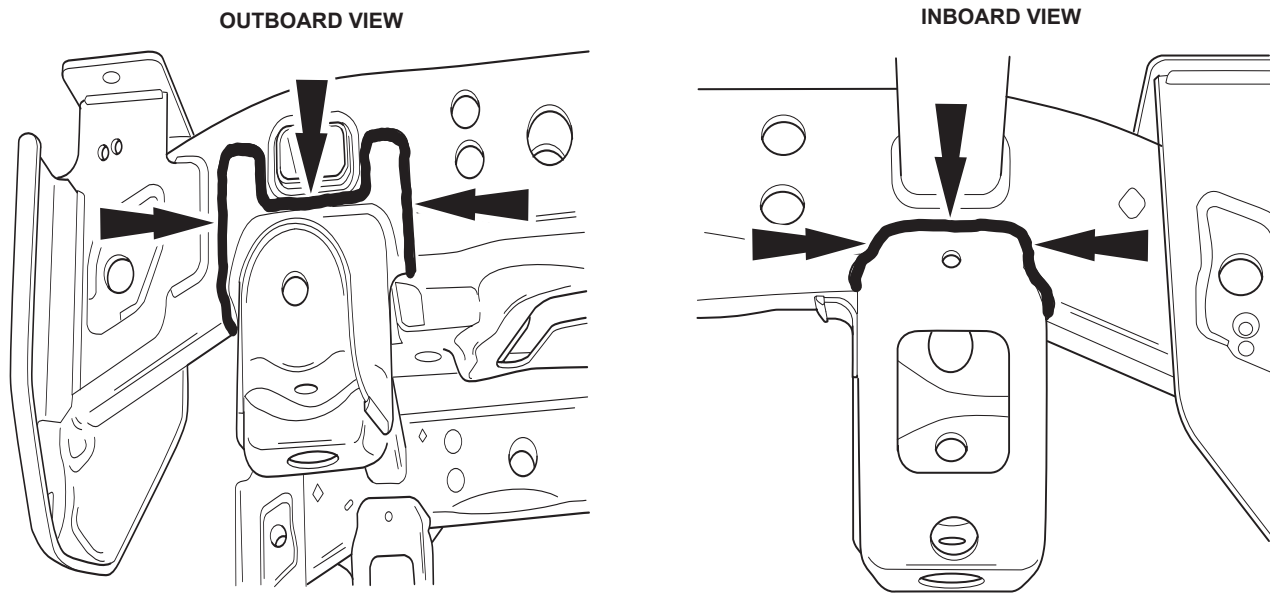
GRIND WELDS SHOWN TO REMOVE DAMAGED SHACKLE BRACKET, DO NOT GRIND INTO THE REAR FRAME RAIL MATERIAL WHEN REMOVING THE BUMPER BRACKET FROM THE FRAME, RH SHOWN, LH SYMMETRICALLY OPPOSITE
